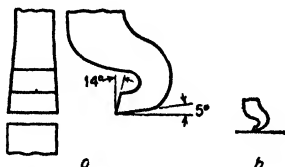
Tool No. 8. (a) Gooseneck finishing tool for cast iron and steel; (b) Application of the tool. (The G. A. Gray Company)
